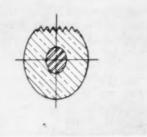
A cross section along line X-X of clamp depicted in Fig. 15 is shown here.
